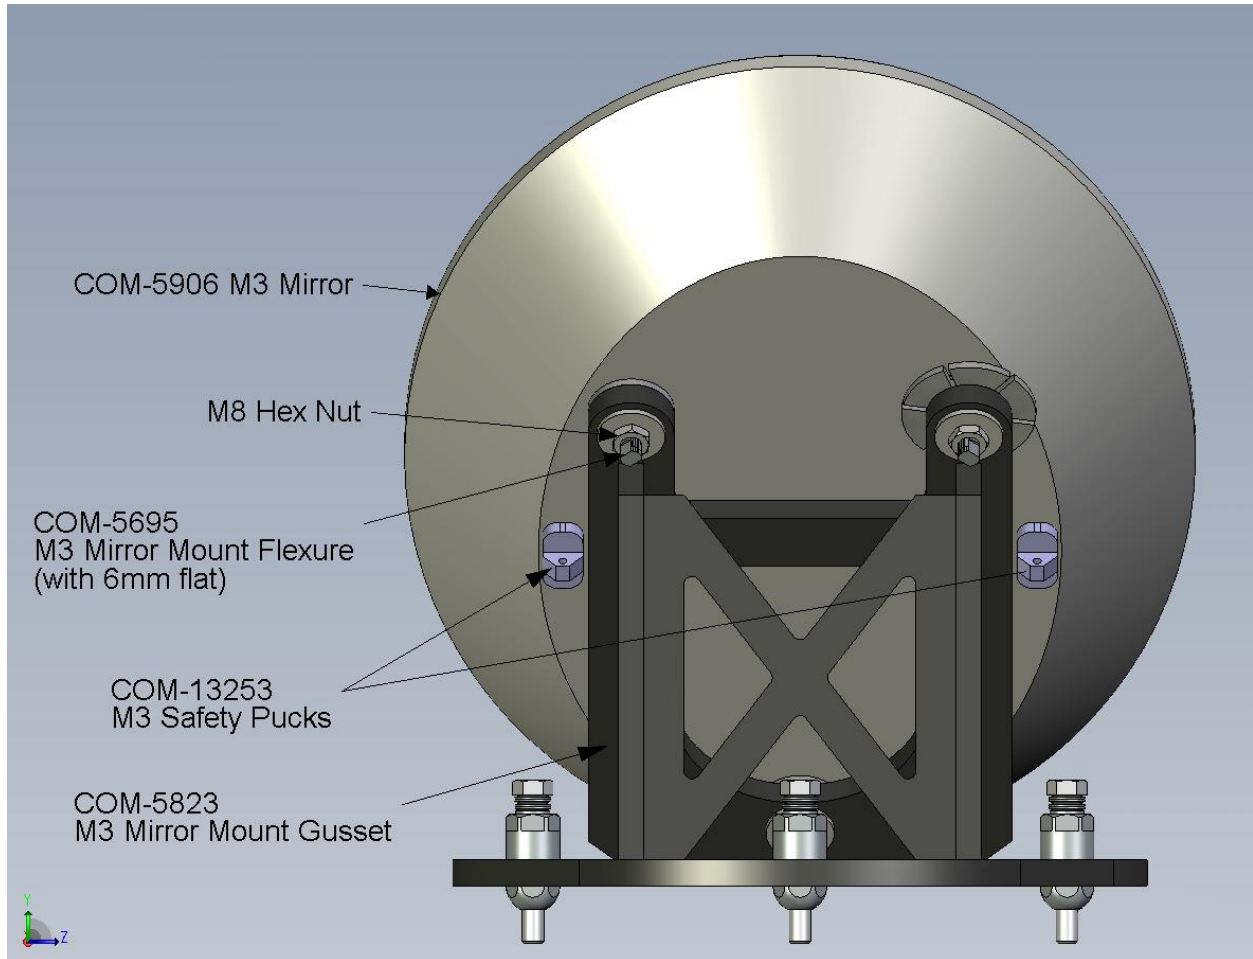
M3 Mirror Mount Assembly Removed from Telescope
